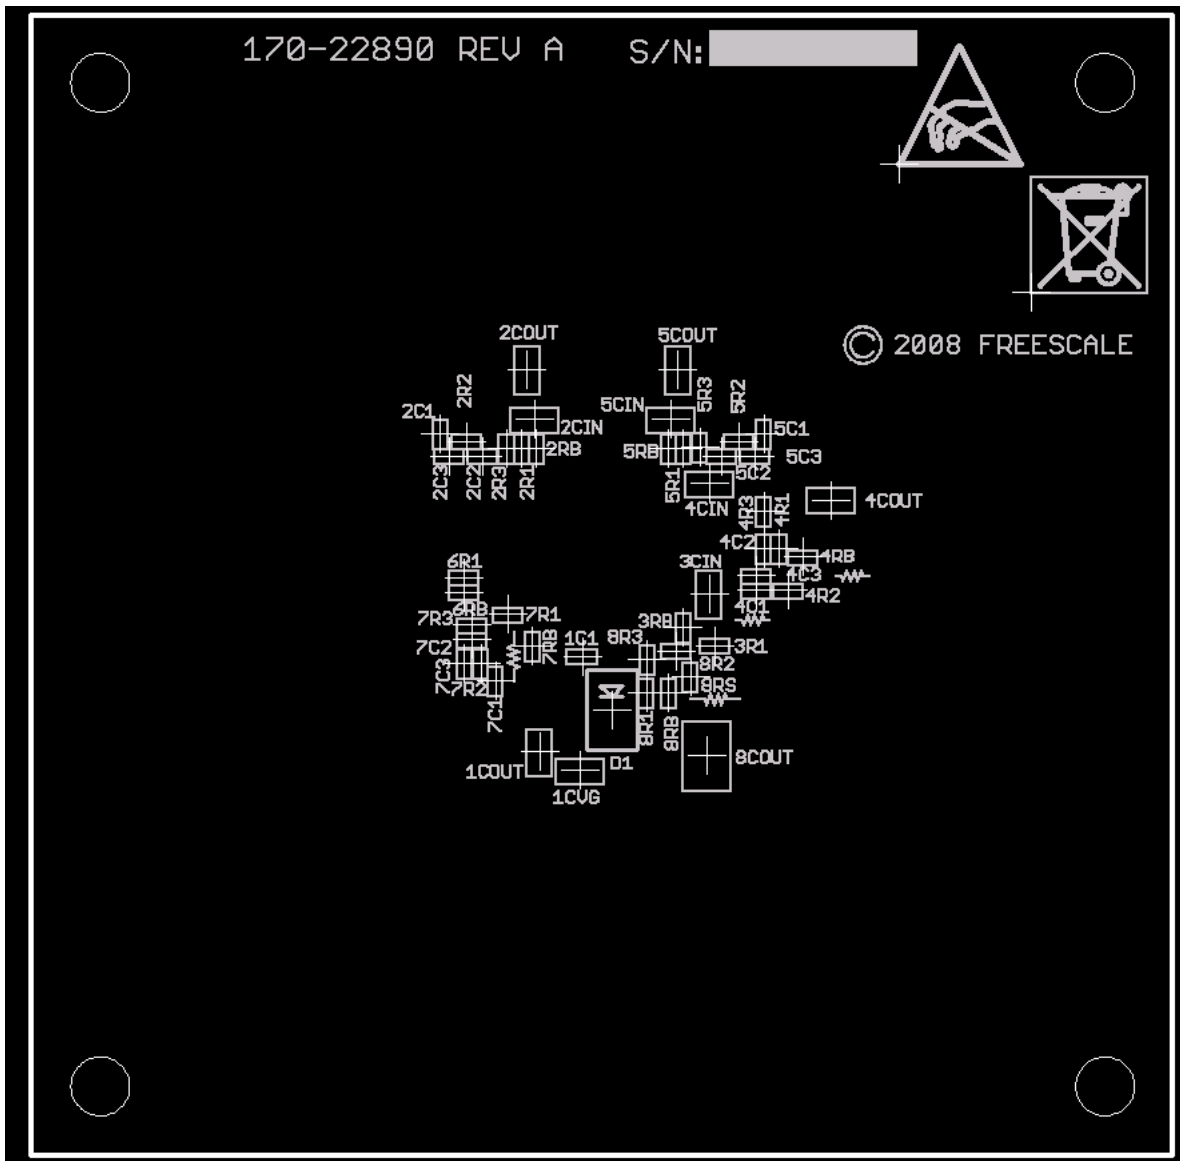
KIT34704AEPEVBE Assembly Layer Bottom
